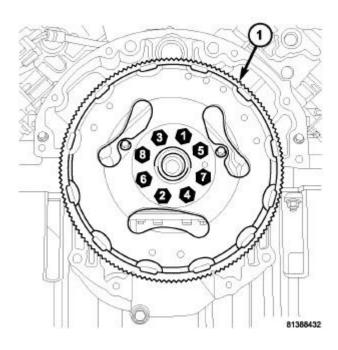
FLEX PLATE TIGHTENING SEQUENCE Courtesy of CHRYSLER LLC
